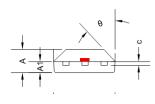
Flat TO-92 (Radial Lead) Package Drawing
